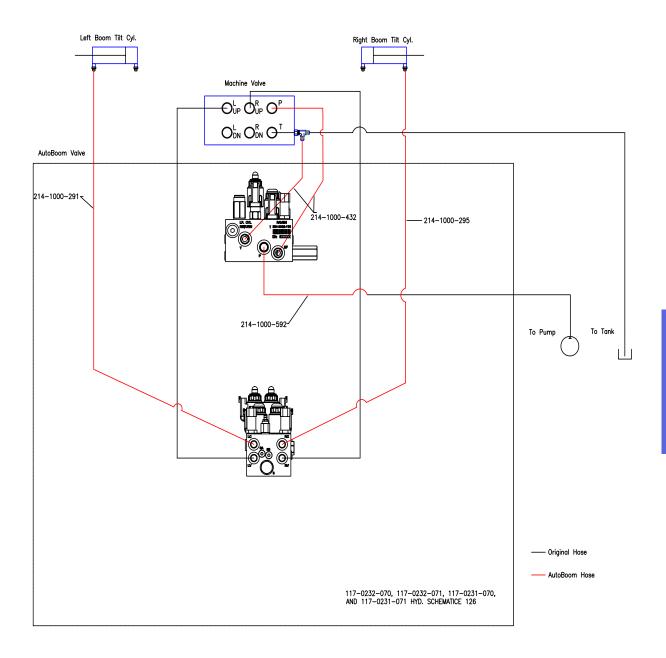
Hydraulic Hoses Installed on Machine's Cylinders
